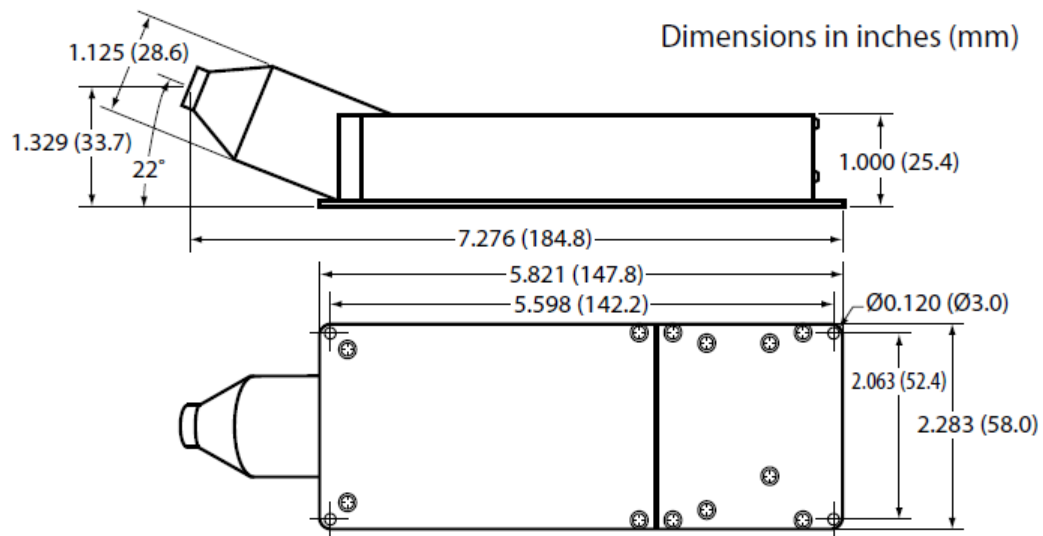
Dimensions of the *Mini-X* X-ray tube [33].
